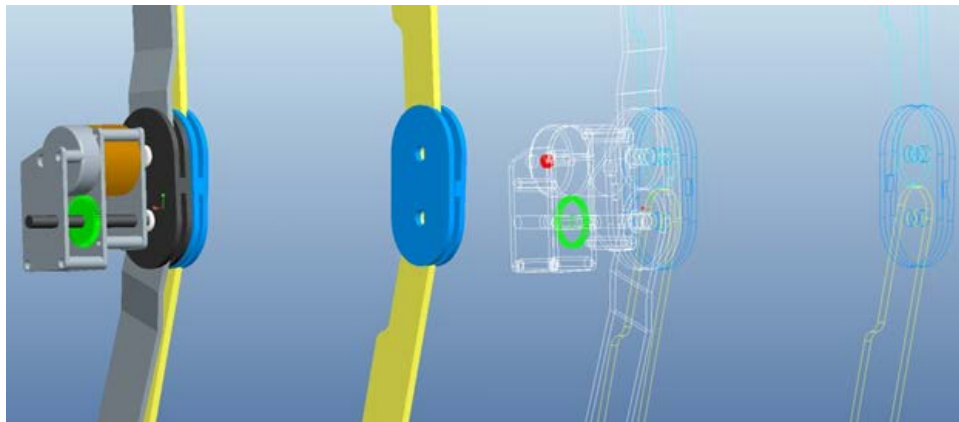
Pro/ENGINEER Front 3D Solid Model & Wireframe Views
